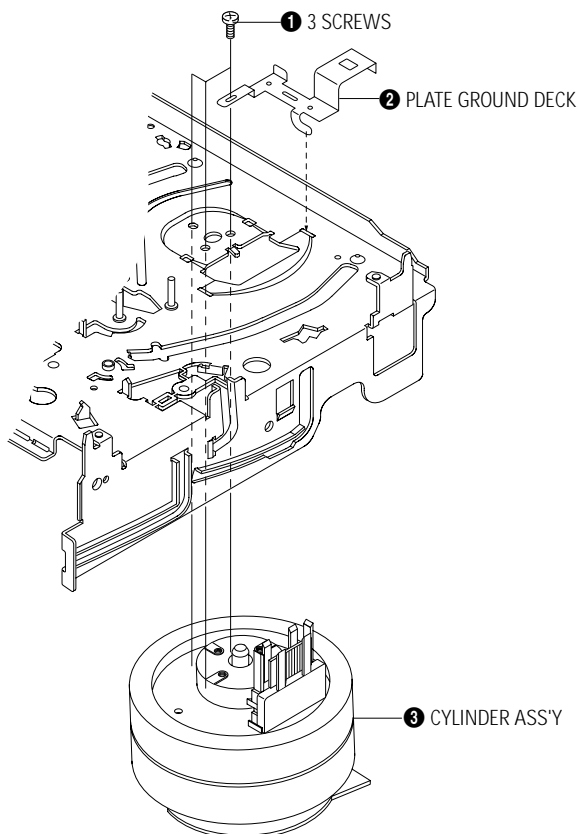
Plate Ground Deck, Cylinder Ass'y Removal
